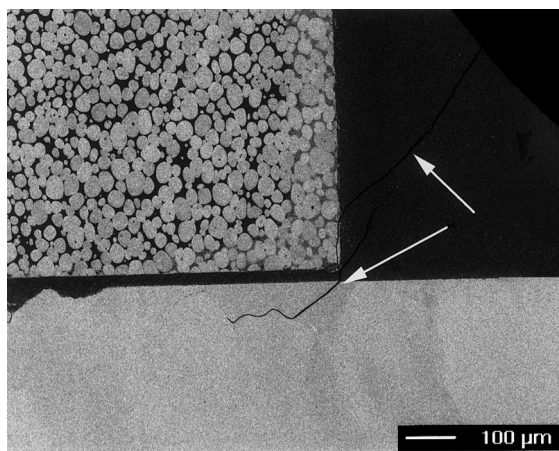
Cross-section of 90% tungsten (top) brazed to pure tungsten 1000°C using Zr-17Ni. Arrows indicate crack formed in fillet which propagated into tungsten armor.
